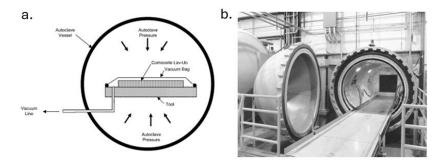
(a) Prepreg lay-up and vacuum bagging setup. (b) Industrial autoclave used for composite curing. [6]
